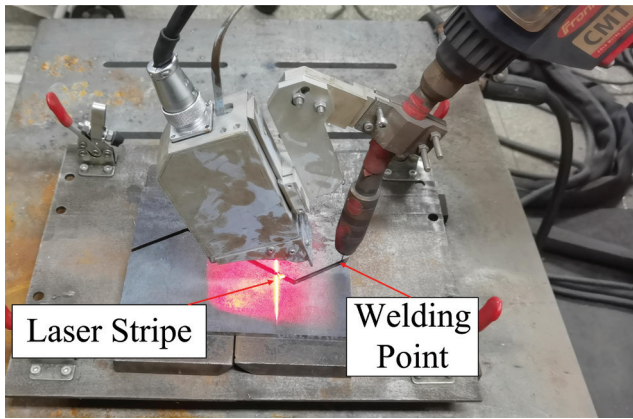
Relative position between weld pool (below the welding torch) and laser stripe in laser vision-based seam tracking system.
